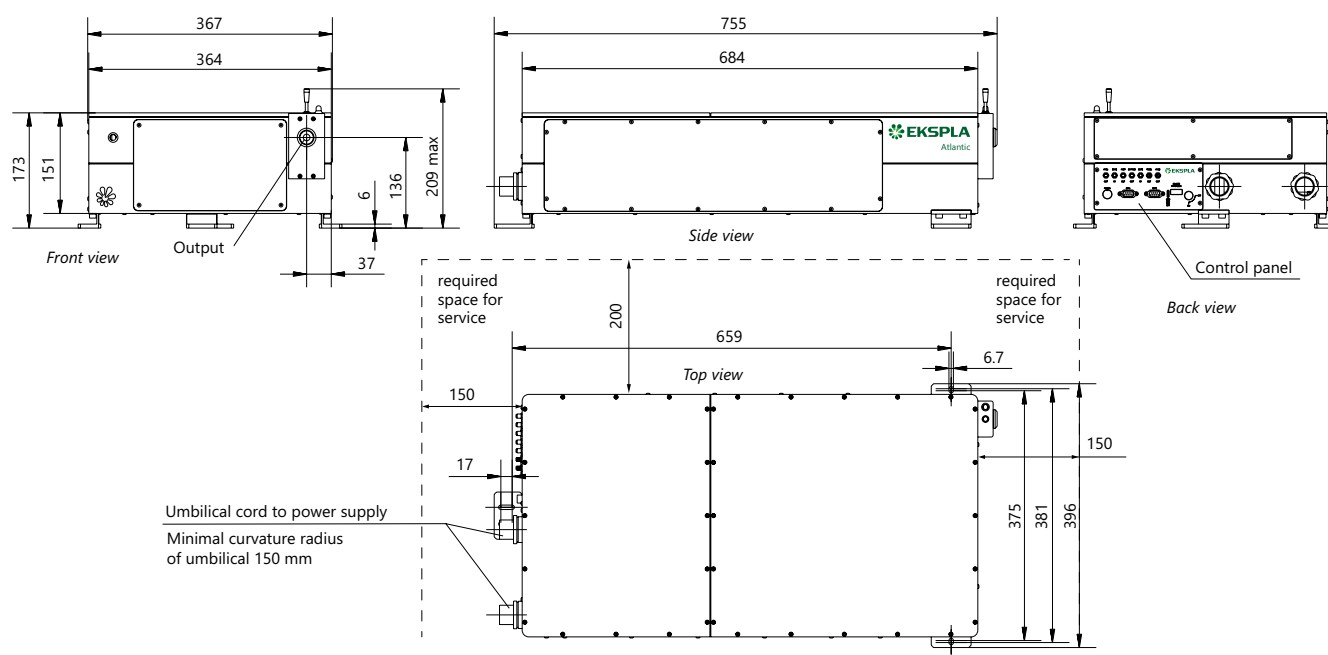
Outline drawings of Atlantic 25, 50, 80 laser head with a single 1064 nm output (dimensions in mm)
